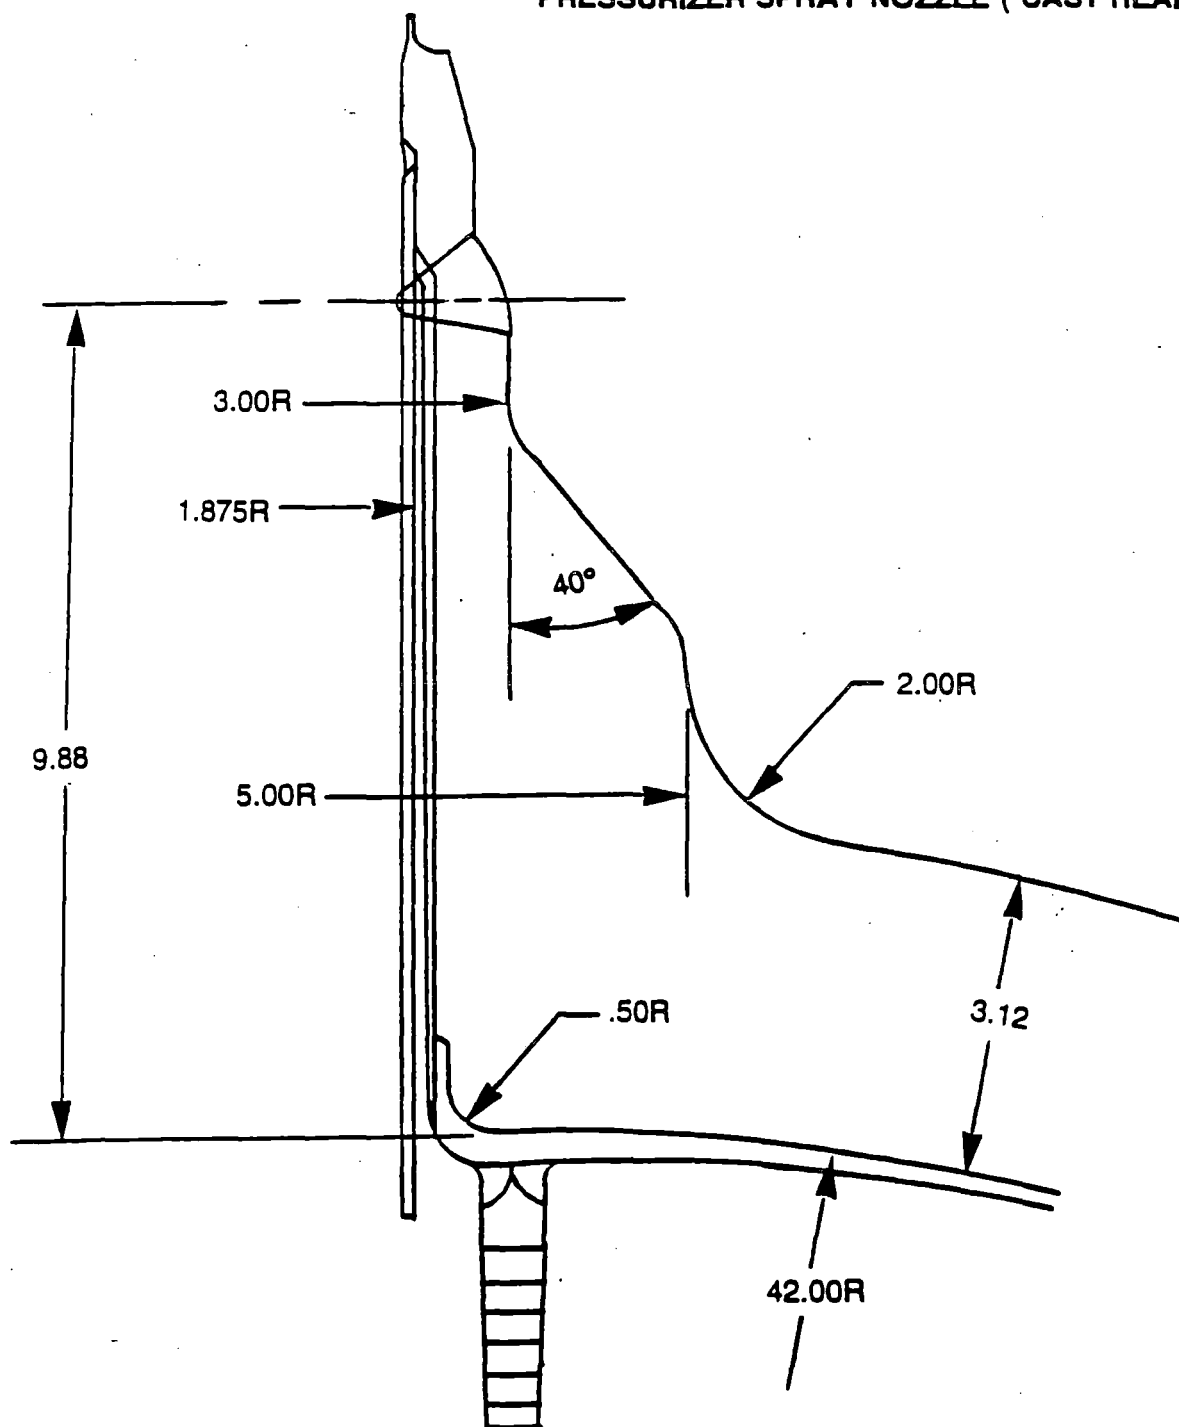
Geometry of a Typical Pressurizer Spray Nozzle - Cast Head Design
